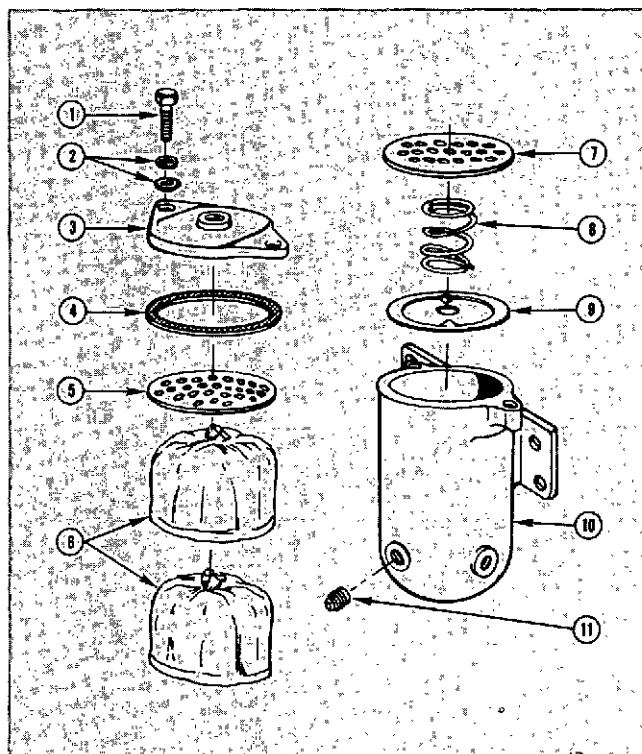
, V40815. Corrosion Resistor—exploded view
